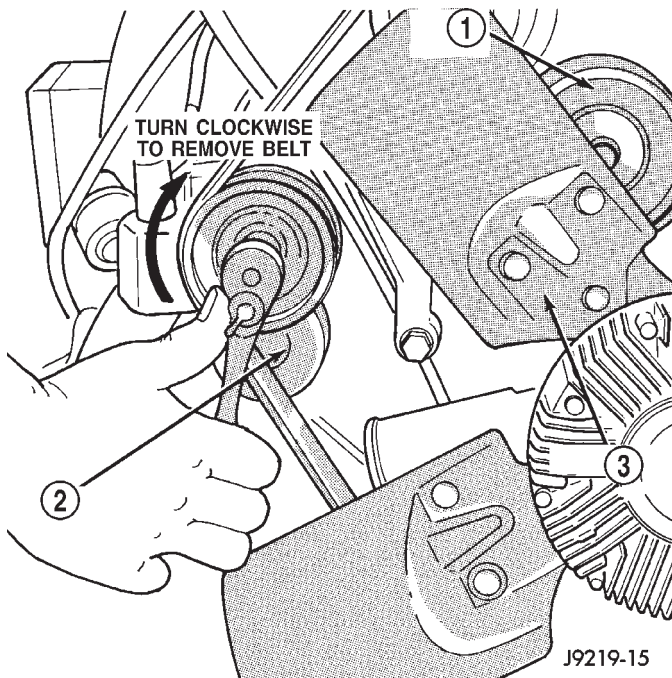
Automatic Belt Tensioner Assembly—3.9L/5.9L Engines
